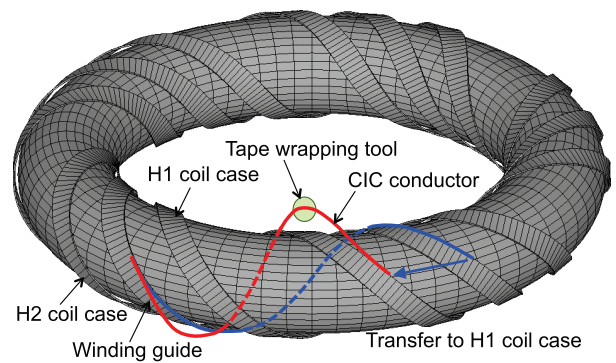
Schematic drawing of transferring a conductor from the winding guide to the H1 coil case.
